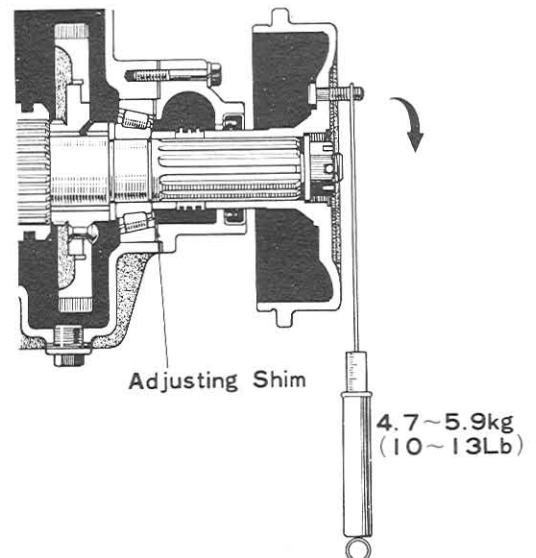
Bearing Pre-load G2396 Adjustment
